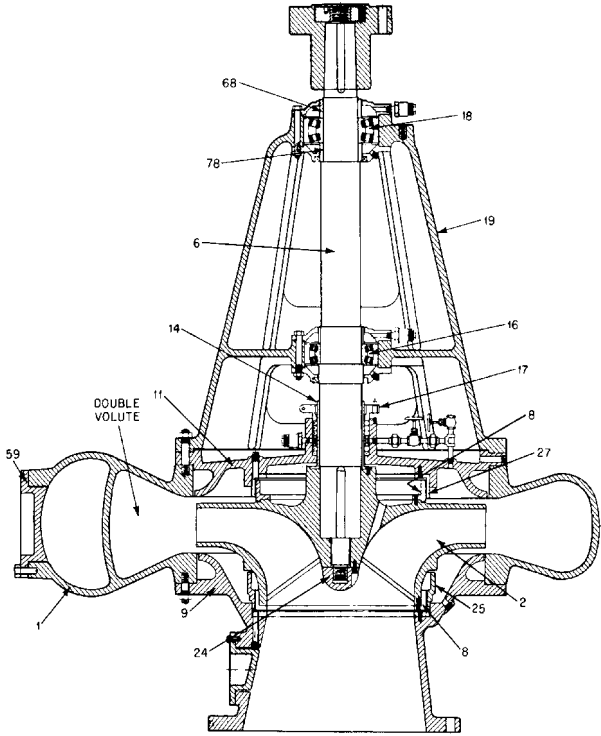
The sectional view of a vertical-shaft, end-suction pump with a double-volute casing (the numbers refer to parts listed in Table 1) (Flowserve Corporation)
